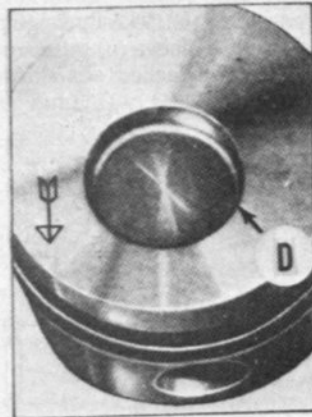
Install piston so depression (D) is nearer flywheel side of engine. Some pistons may have an arrow on crown and arrow must point towards flywheel.
